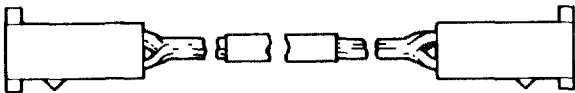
Adapter Cable Test Set (Sheet 4 of 4)
